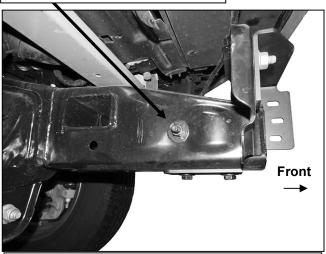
Driver/left Mounting and Support Brackets pictured from below
